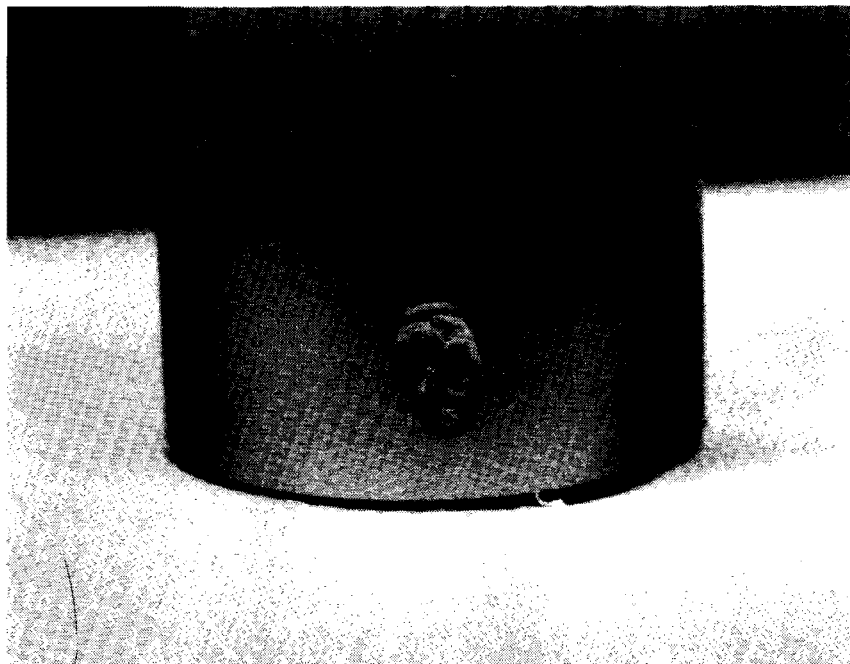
90-Degree Gearbox -462 Shaft (Inner Roller BRG Race
